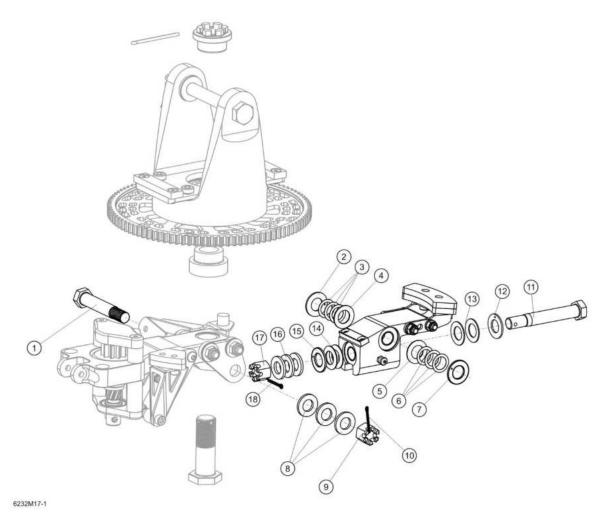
Gimbal Assembly Rotor System III (with spring washers)
